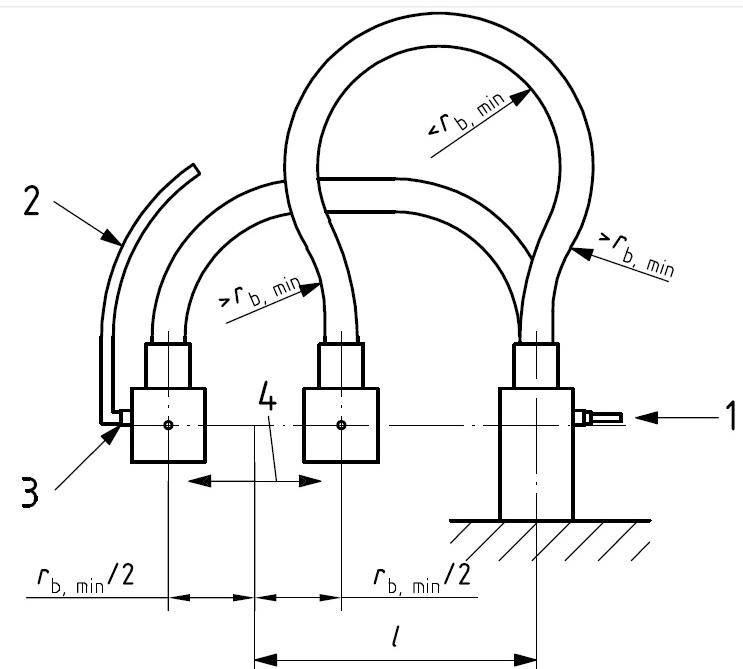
Hydraulic impulse test with flexing Arrangement of test piece using a horizontally reciprocating manifold
